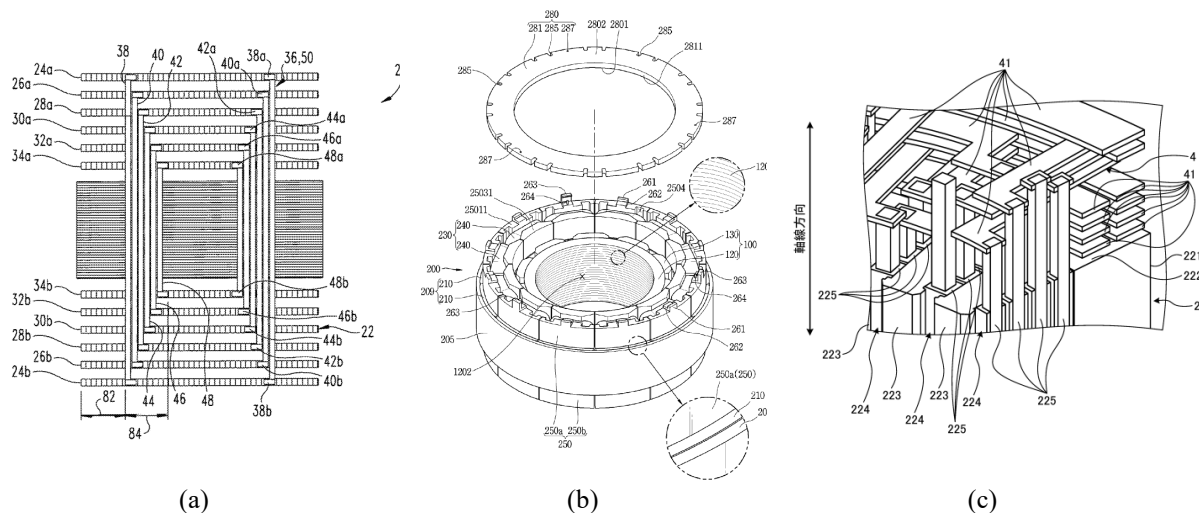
Example of PCB windings for radial flux motors at ABB [1] (a), LG Electronic [2] (b) and Toyota Motors [3] (c)
